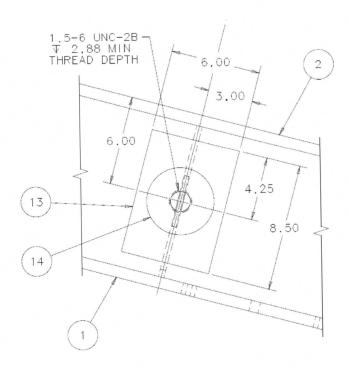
<u>The dimension of the lifting lug weldment.</u>
